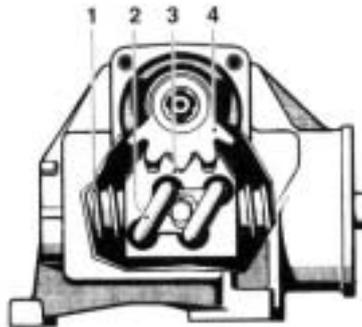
Steering system, Steering worm(1), recirculating balls(2), steering nut(3), steering shaft with gear teeth.
